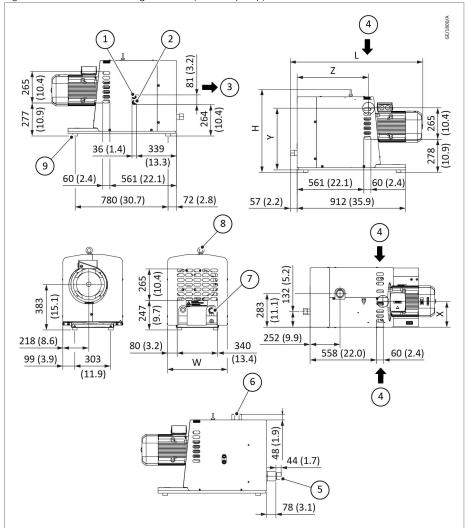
Dimension drawing - CP 300 (Vacuum pump)
